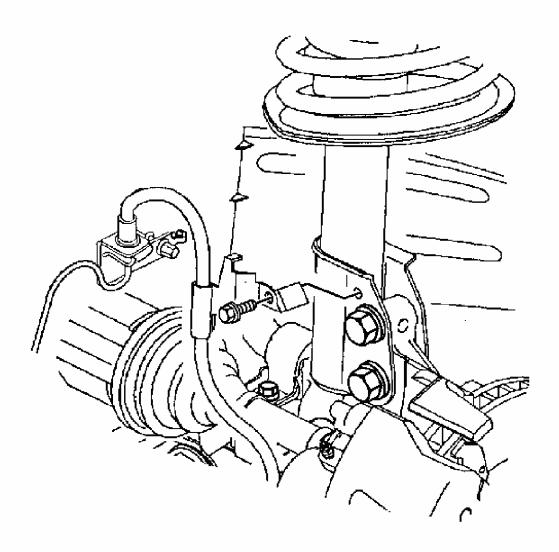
Locating Brake Hose Retainer Bolt Courtesy of GENERAL MOTORS CORP.
